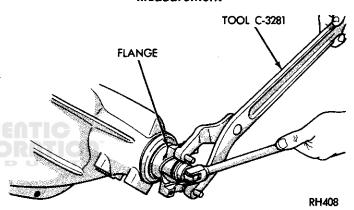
Drive Pinion Gear Shaft Yoke Nut Removal
